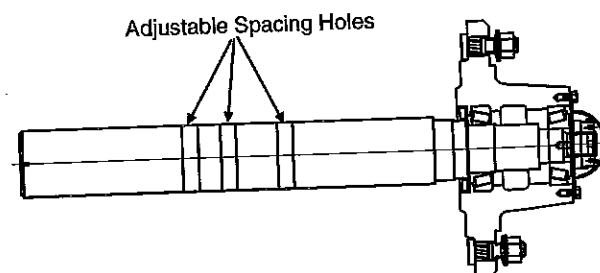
Fixed Carrier Wheel Spindle Adjustment.
